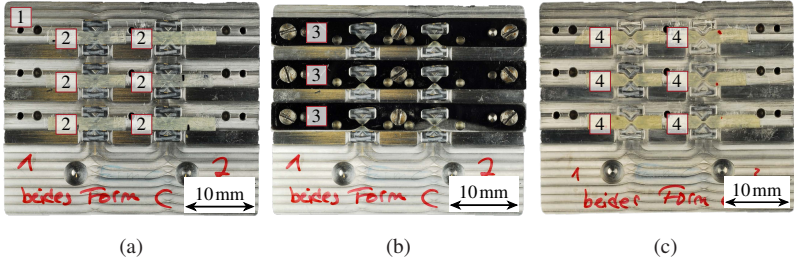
CNC-machining of the final specimen contour: (a) machining fixture [1] with six specimen stripes [2] prior to machining, (b) with mounted holding clamps [3], (c) stripes with final contour [4] after machining
